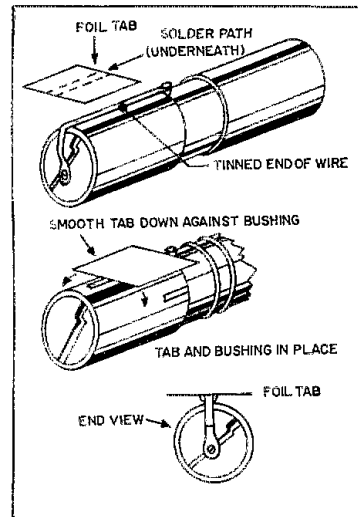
Further details of trap construction, showing the foil tab and bushings.
